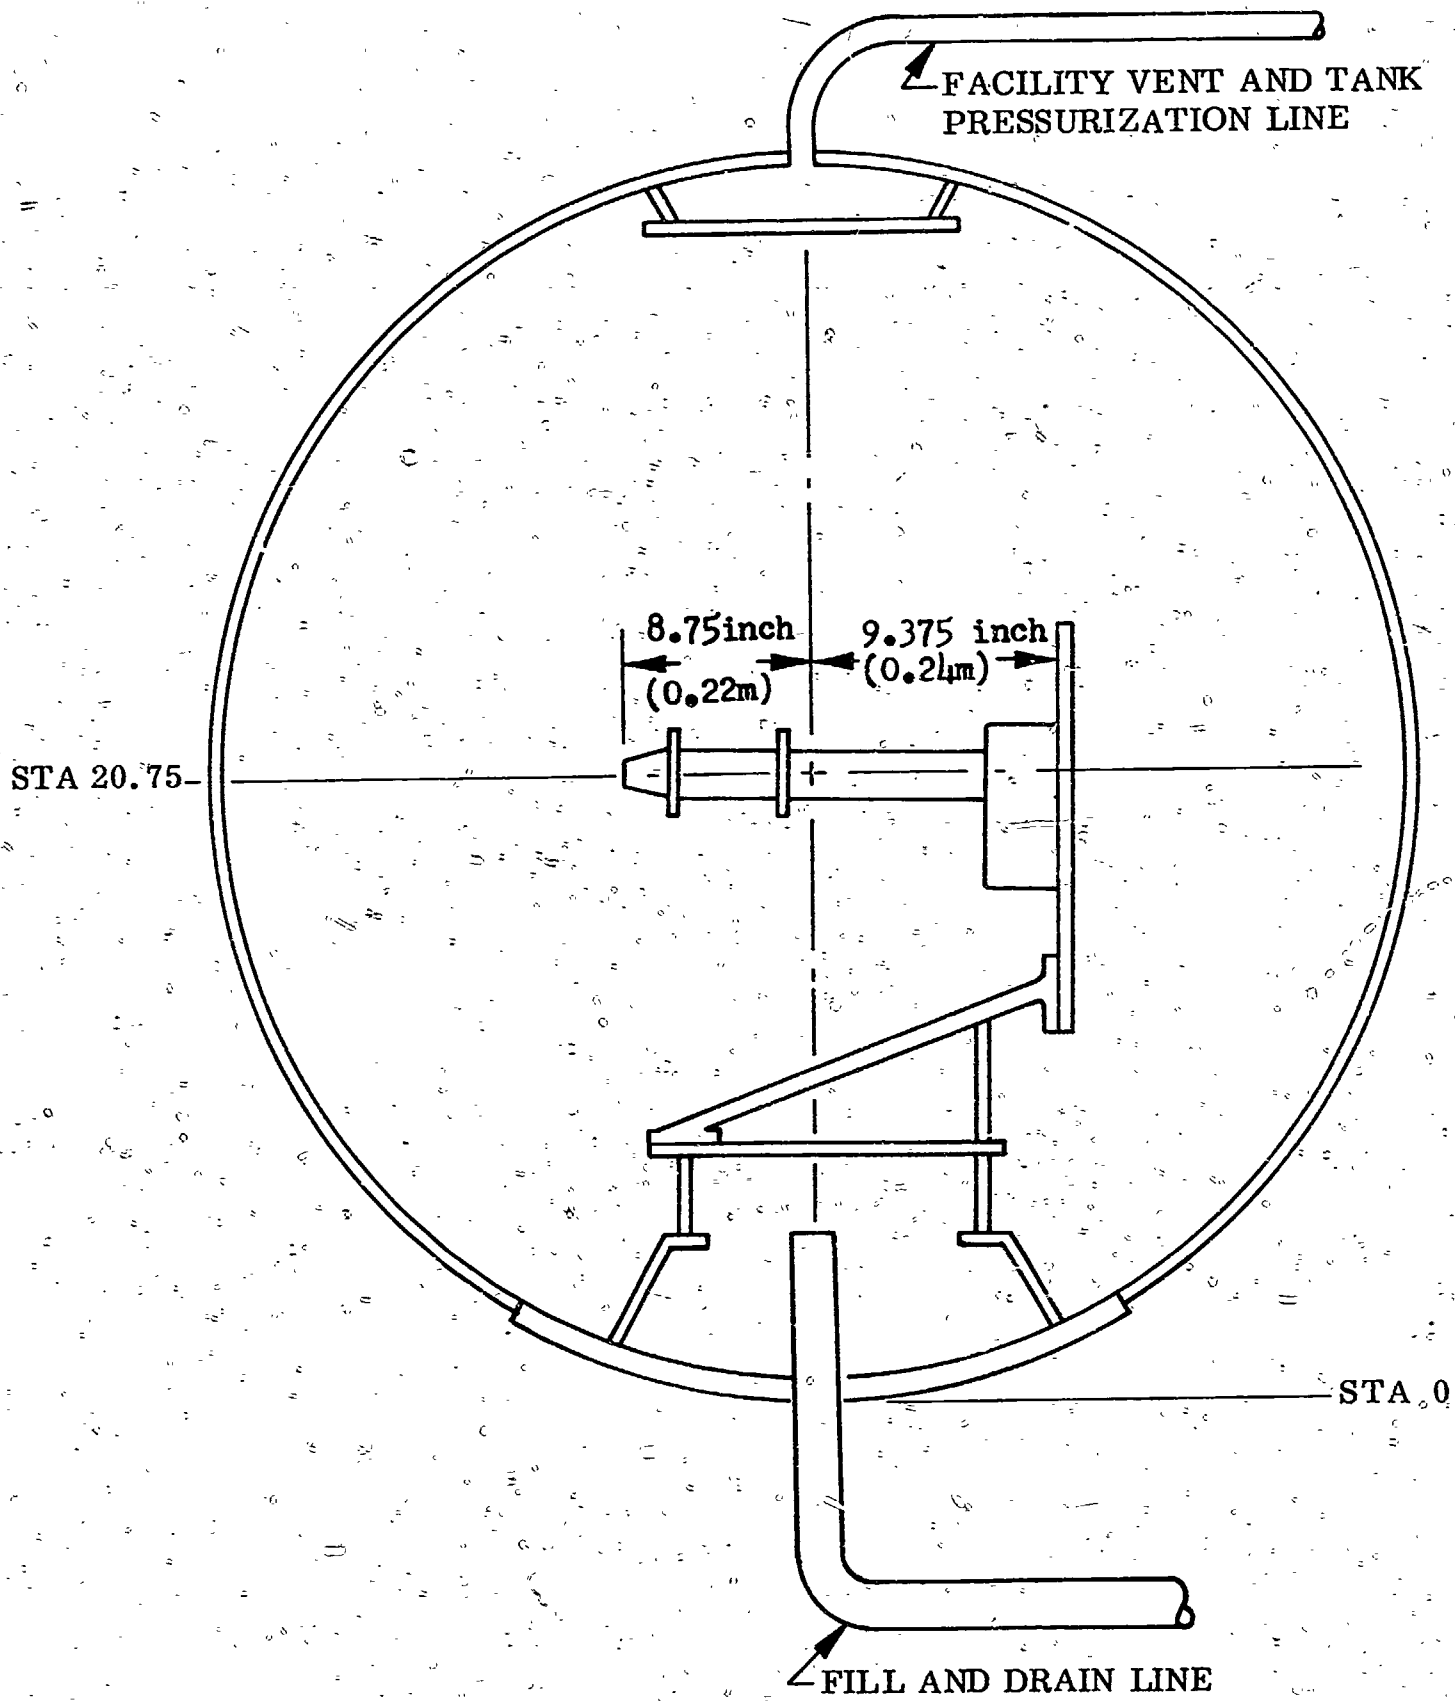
Side Mount Test Configuration - 41.5 inch (1.05m) Tank
